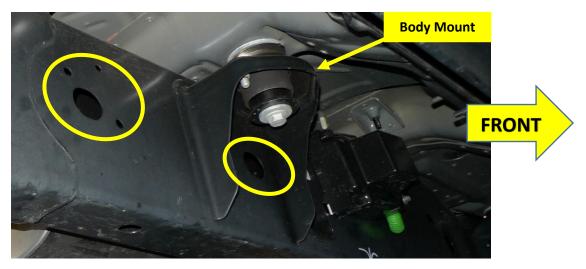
Frame Hole Locations for RAPTOR-203; below front door
